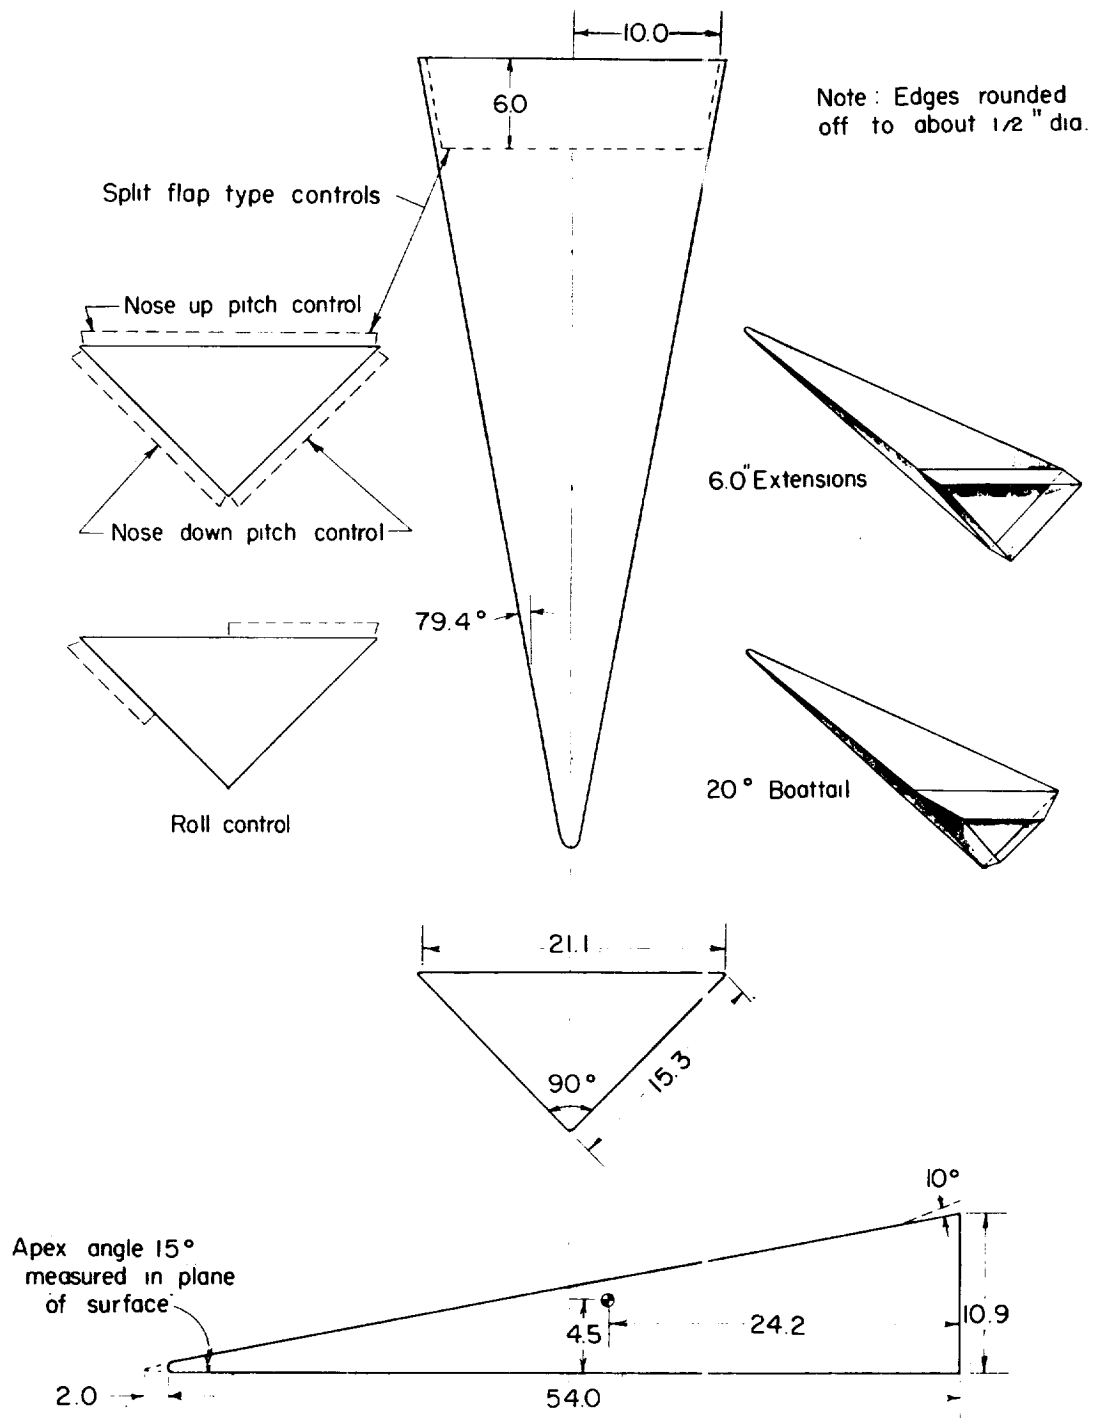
Three-view drawing of model used in investigation. All dimensions are in inches.
